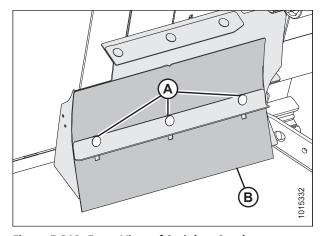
Front View of Stainless Steel Adjusting Panel
